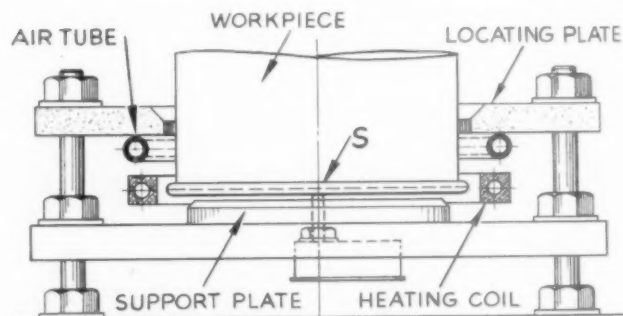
Constructional details of the fixture used for soldering the can in Fig. 9, showing the locating plate and air tube for cooling.
